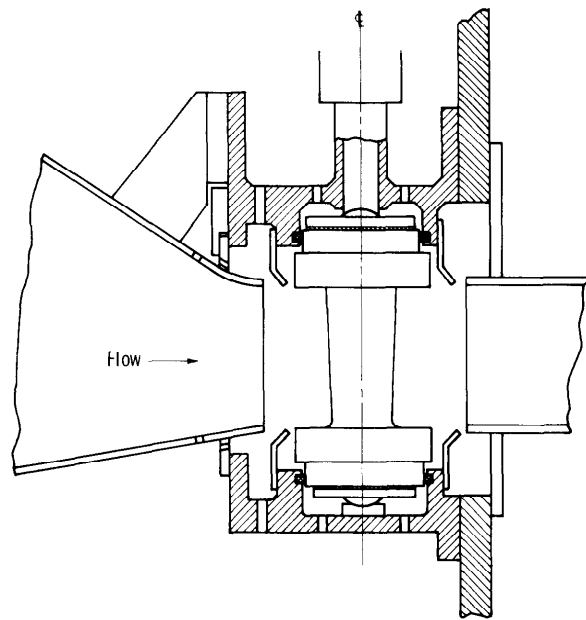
Ceramic Stator Vane Assembly for Static Rig Testing at 2200°F
